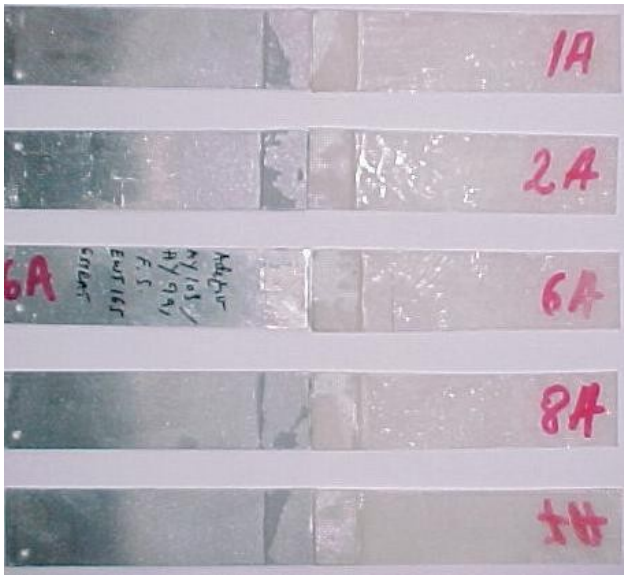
Hybrid (aluminium/wet molded laminates, 6 layers) single lap joint aspect after static testing for $L_a = 12.5 \text{ mm}$
